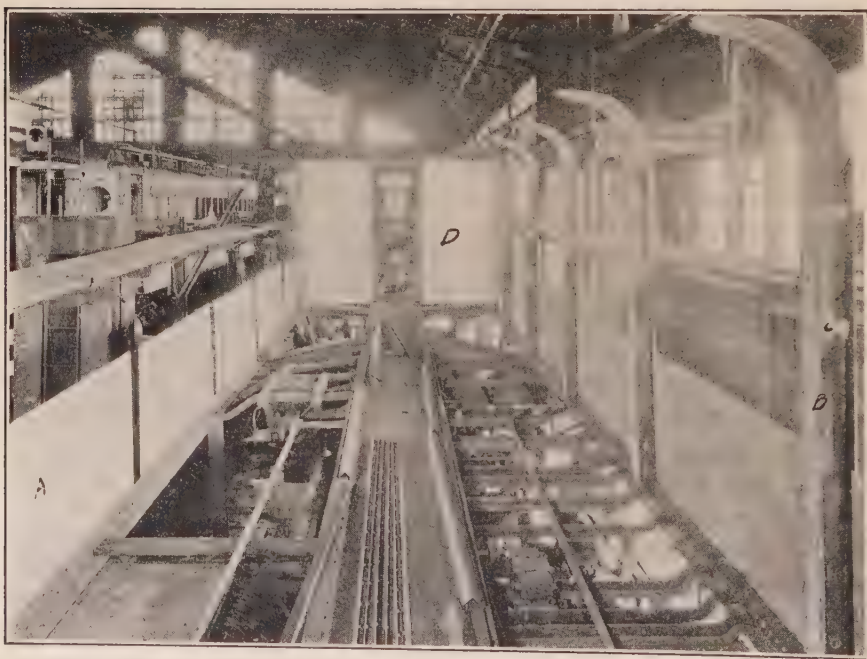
RAILWAY PASSENGER CAR IN PROCESS OF CONSTRUCTION BY THE PENNSYLVANIA RAILROAD, SHOWING USE OF ALUMINUM AND ITS ALLOYS: A, 17ST SHEET; B, HOT-FORMED 17ST; C, WINDOW BRACKET OF 195 H-T CASTING; D, ALUMINUM SHEET.
